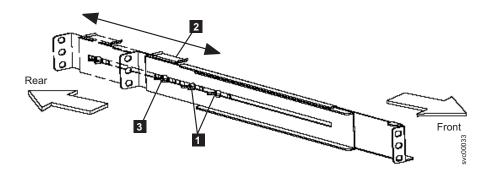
Adjusting the rail depth on the 2145-1U uninterruptible power supply
